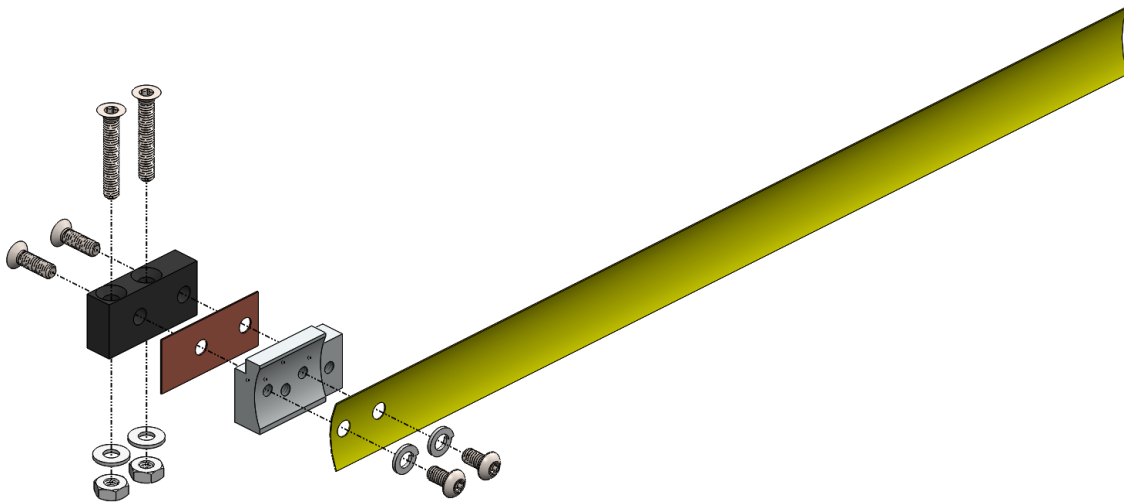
Exploded view rendering of the antenna arm feed concept. Courtesy of T. Tarnowski & ORCASat MECH team.
